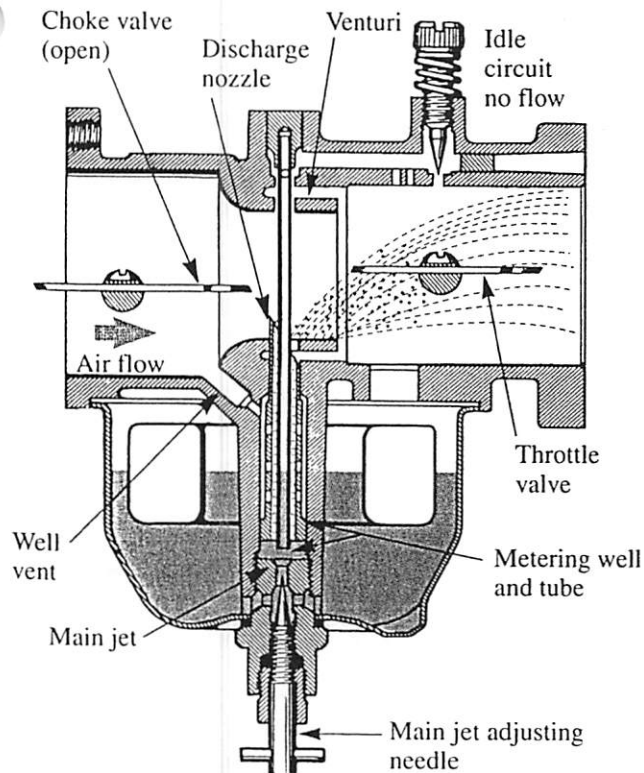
Full throttle. Idle orifices have stopped feeding fuel due to reduced vacuum in that part of carburetor. A full flow of fuel is being drawn from main nozzle.
